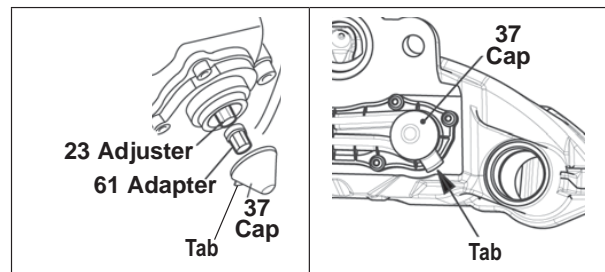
EXPLODED VIEW OF ADJUSTER AND ADAPTER
